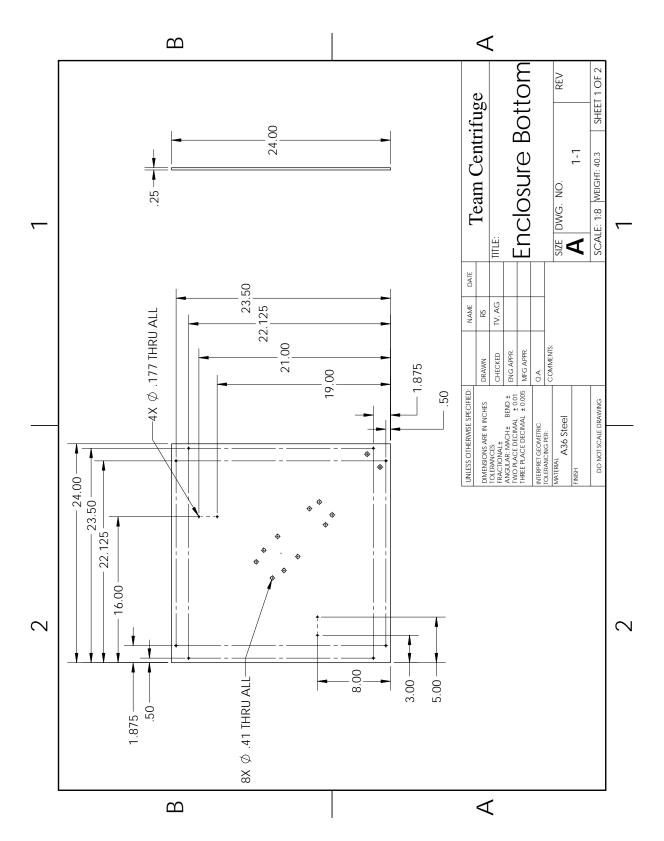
Dimensional Drawing of Enclosure Bottom Plate
